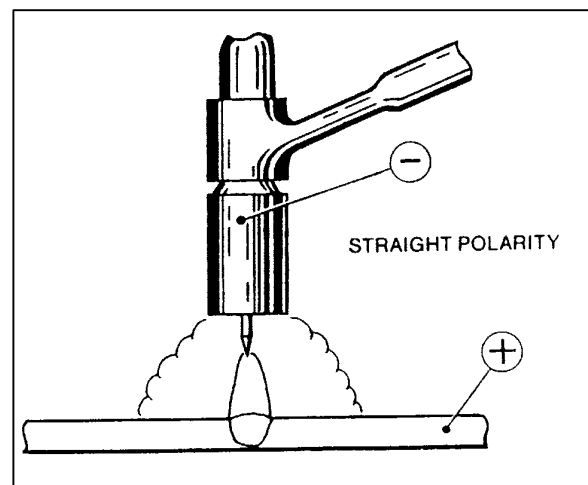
Set TIG welder to DC current, straight polarity for welding mild steel, stainless steel and titanium.
